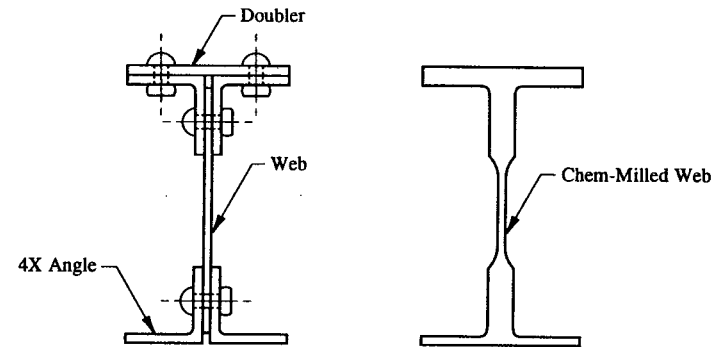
(a) Built-up beam section. (b) Simulated integral beam section.
